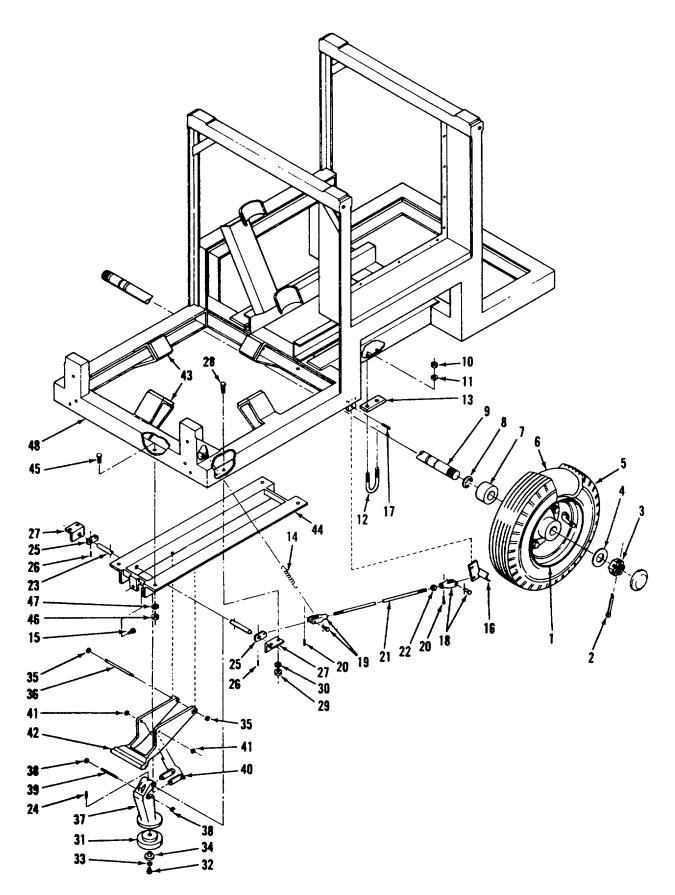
Cart Chassis and Wheel Assembly - Exploded
